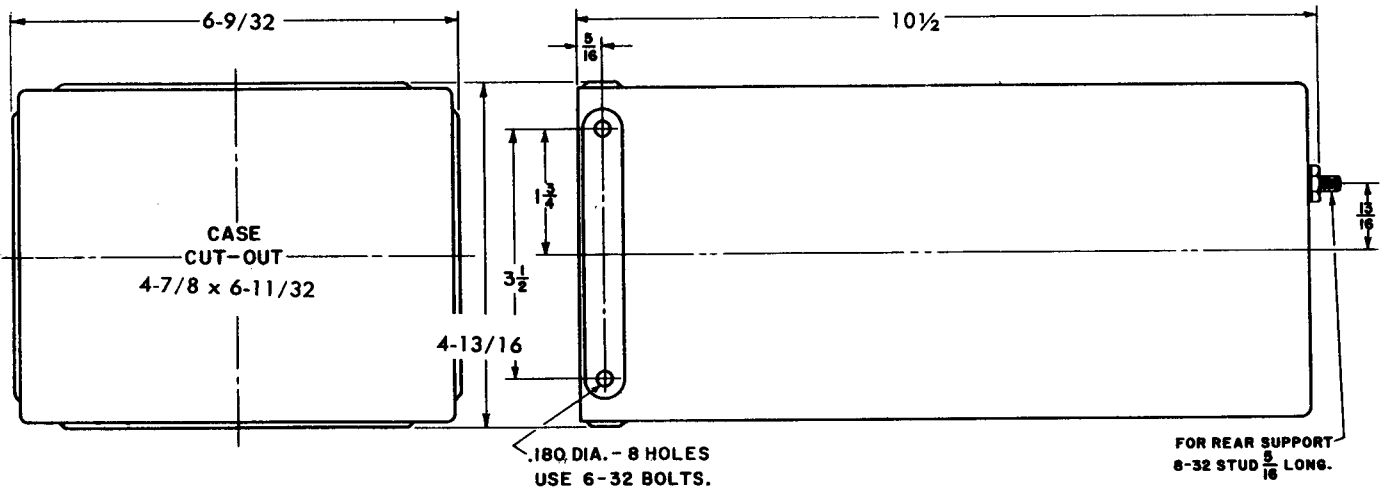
VHF TRANSMITTER-RECEIVER UNIT—MOUNTING DIMENSIONS
